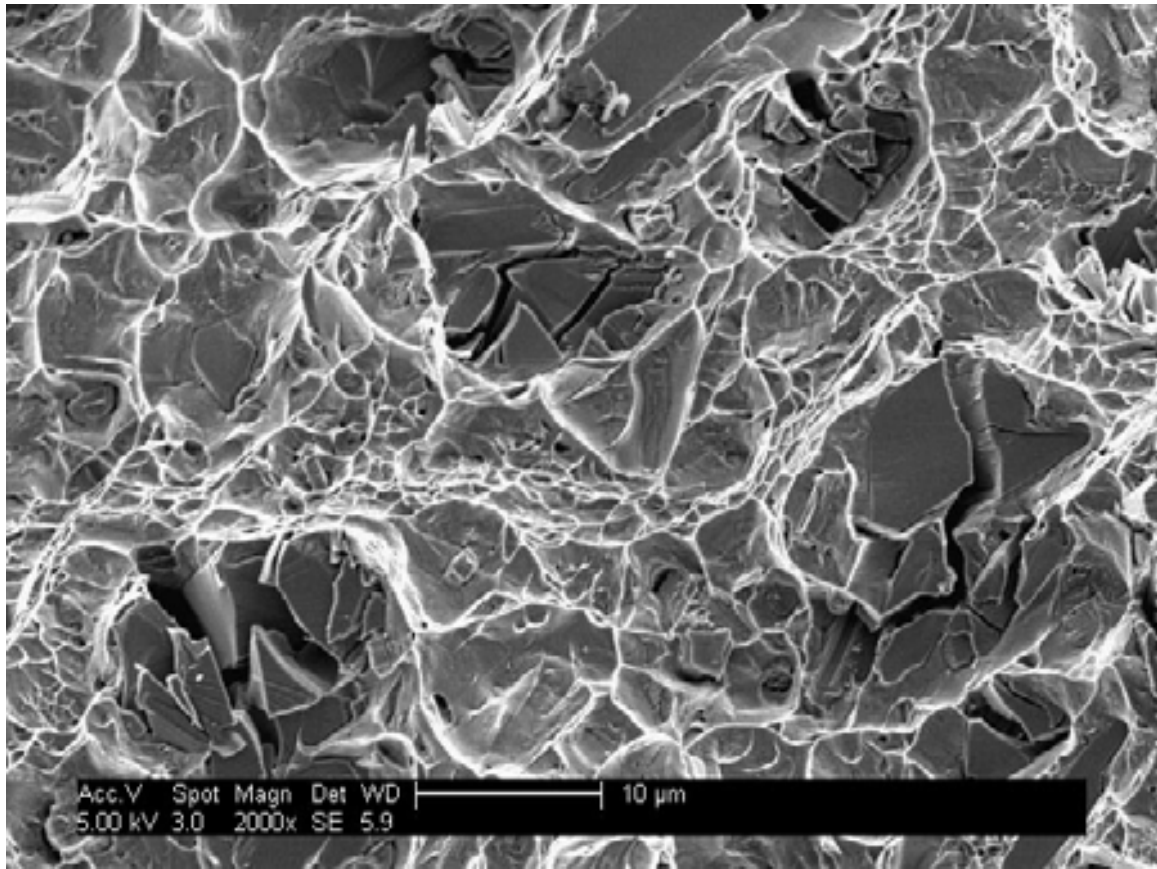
Fracture surface of extruded Ti-6Al-4V-2.9B composite showing significant damage to TiB whiskers aligned with the extrusion direction.
